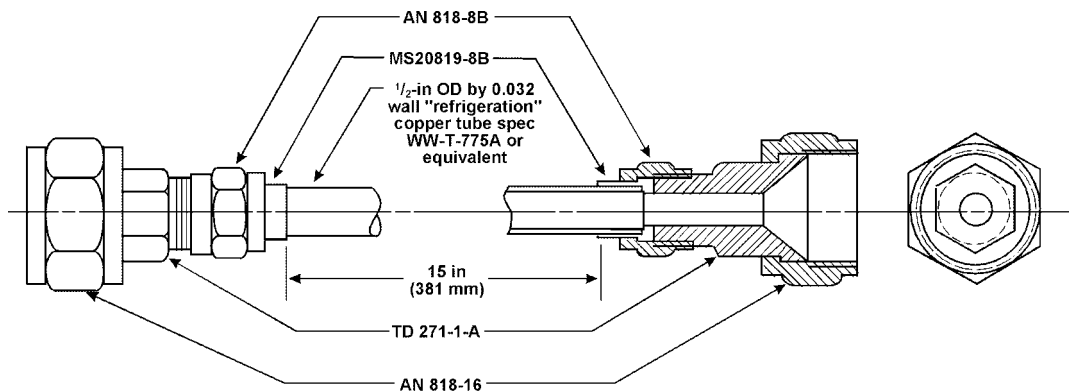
Btu Heat Transfer Device—Test Specimen
